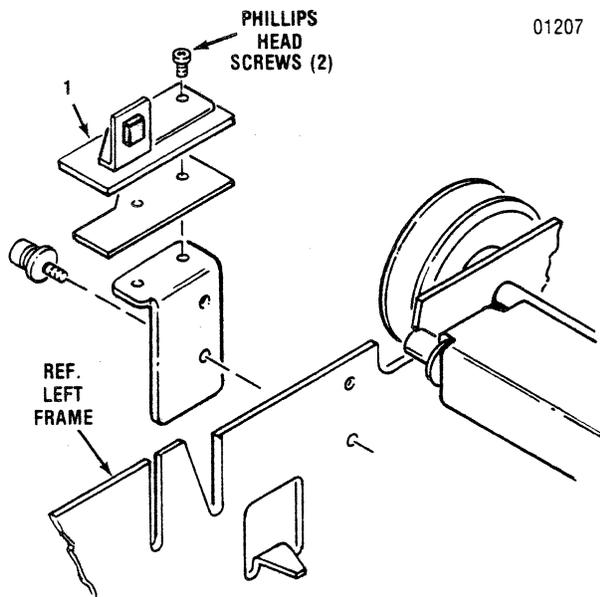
Removal/Replacement, Cover Interlock Switch
